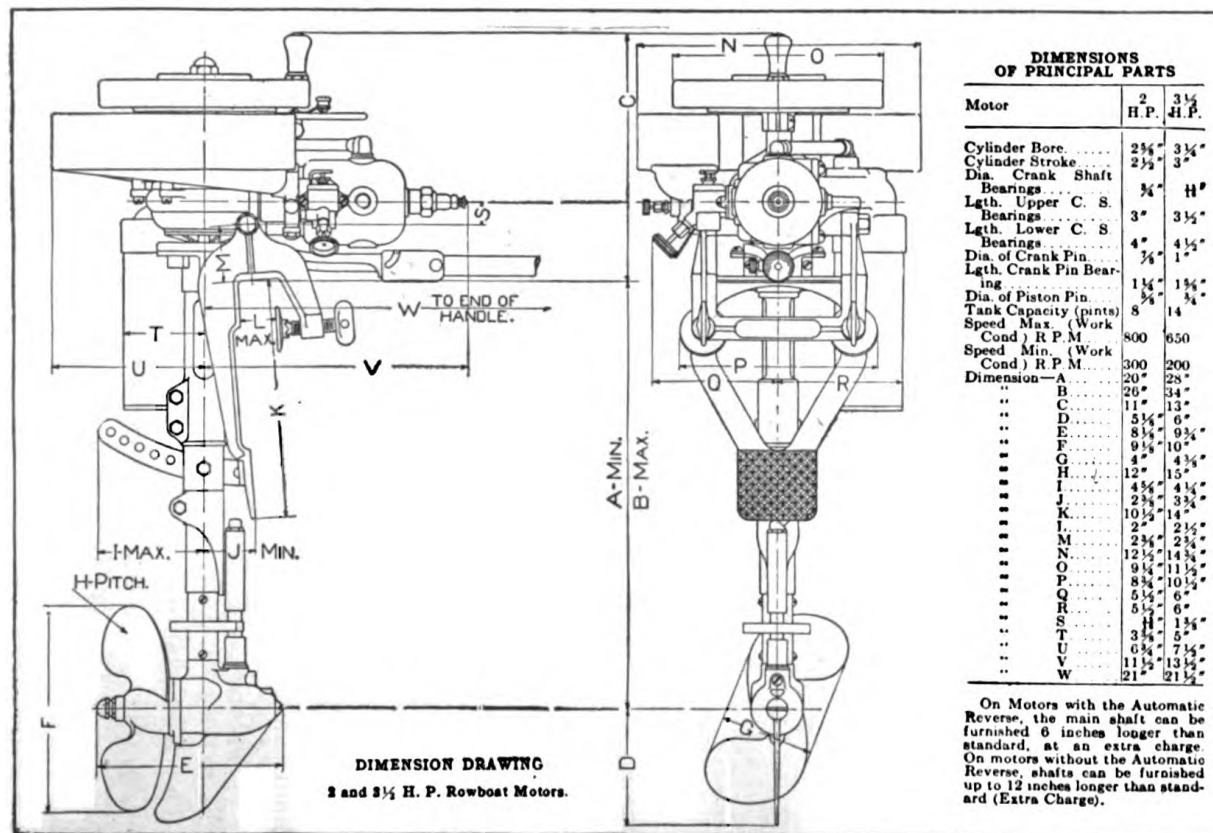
Dimension Drawing of Evinrude Rowboat Motors
